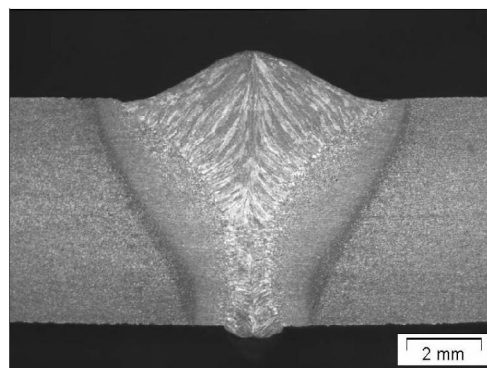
Formation of the weld in hybrid welding [180]
